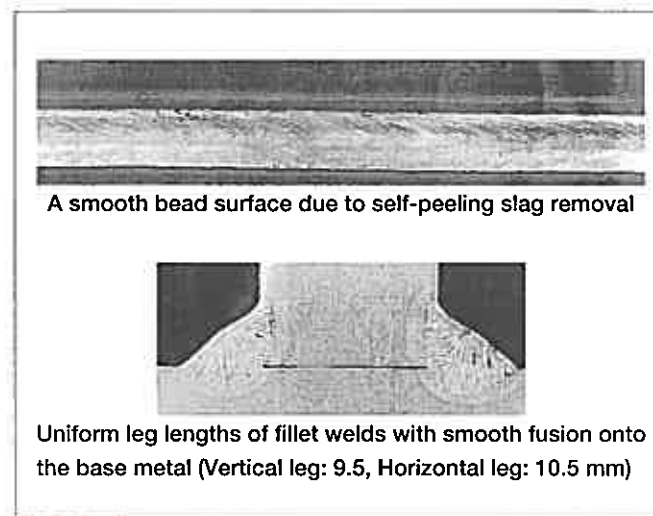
A smooth, uniform bead appearance and cross sectional profile of DW-200 horizontal fillet weld (Wire size: 1.4 mm ϕ , Welding current: 330Amp, Arc voltage: 33Volt, Welding speed: 30 cm/min)
